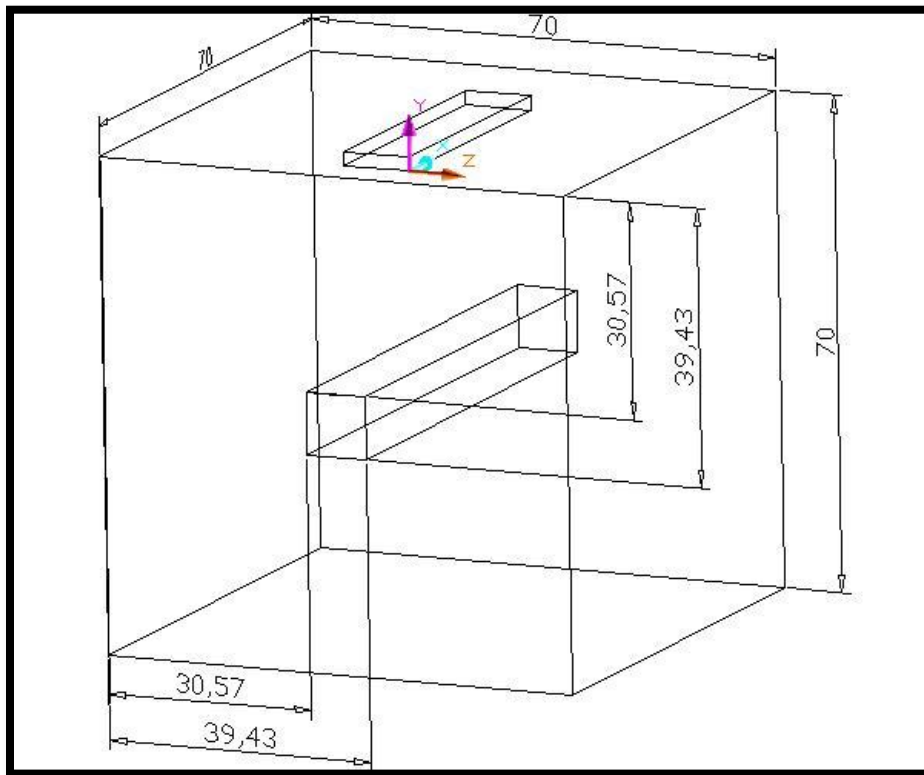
3D view for Dimension of Square shape cross-sectional cooling channels
